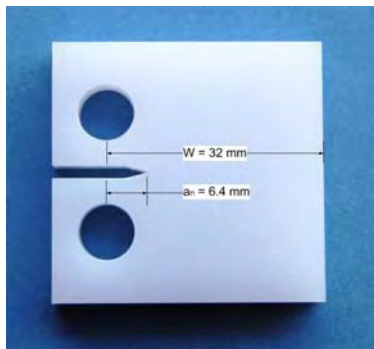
ASTM E647-08 fatigue crack specimen
